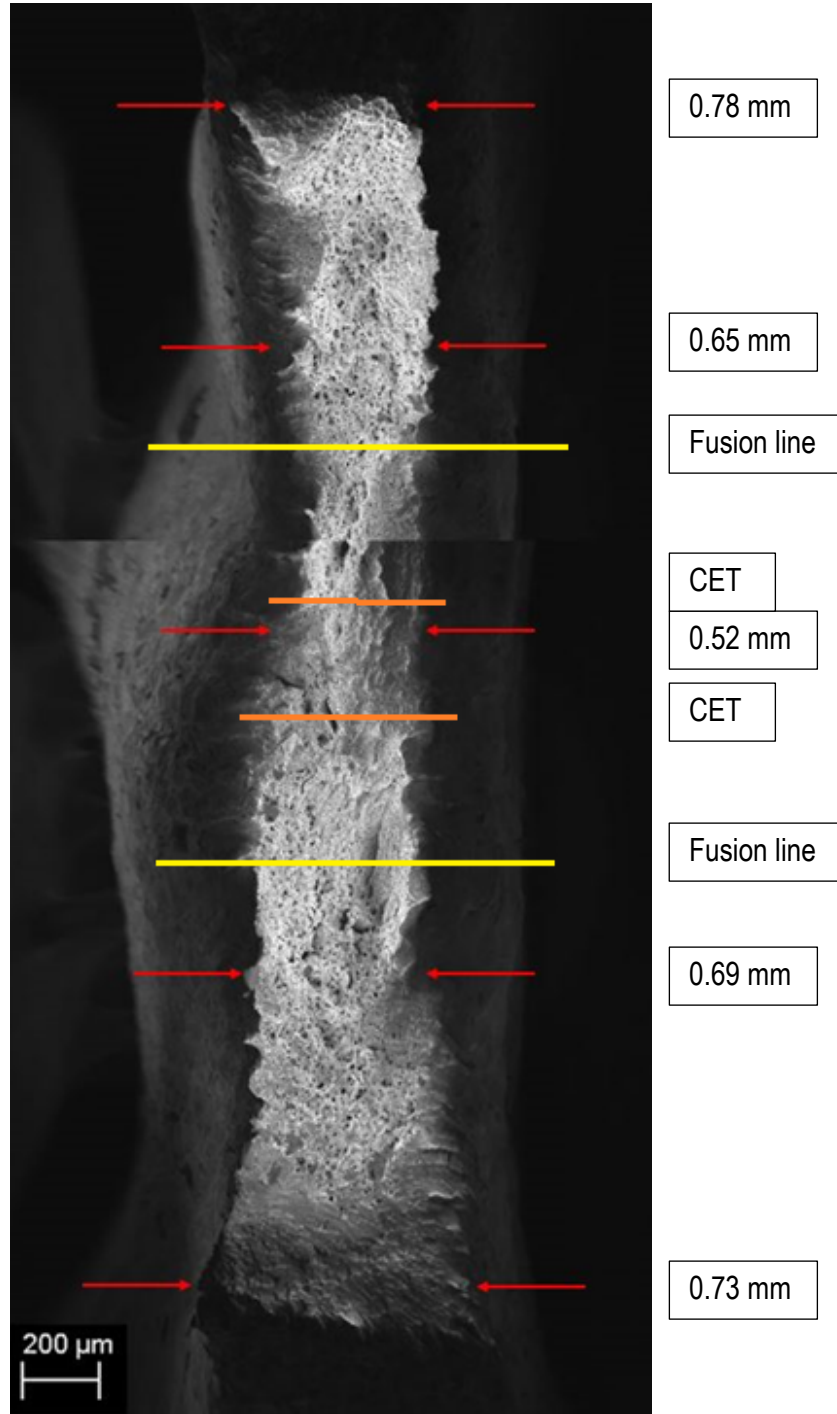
Scanning electron micrograph of the fracture surface of a tensile coupon machined from a Grade 441 weld that had 30% weld metal in the tensile gauge width. The shape of reduction in area is indicated by dimensions, the fusion line and columnar-to-equiaxed transition was added as indicated. (Weld ID: CB13012, with a pulse frequency of 20Hz, an electrode taper angle of 30°, peak welding current of 130A and a welding speed of 12 mm/s. The sample had 54% equiaxed grains and a 37% elongation). Magnification: 80x
